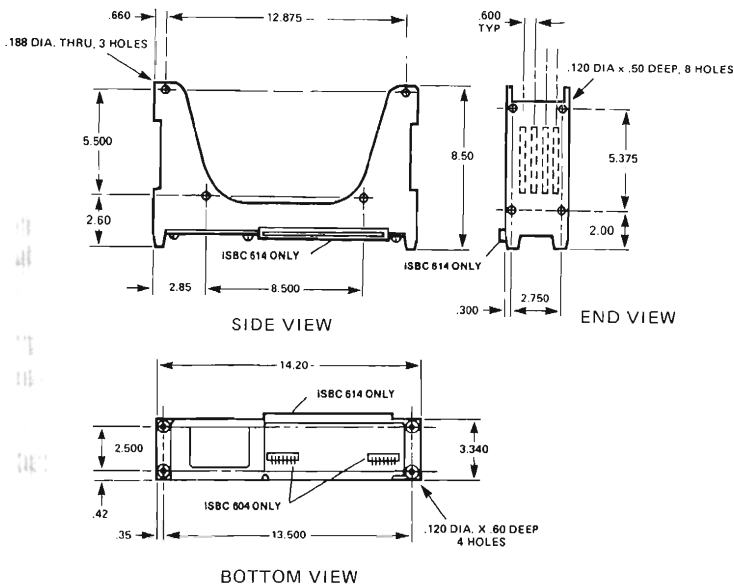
ISBC 604/614 Modular Backplane and Cardcage Dimensions
